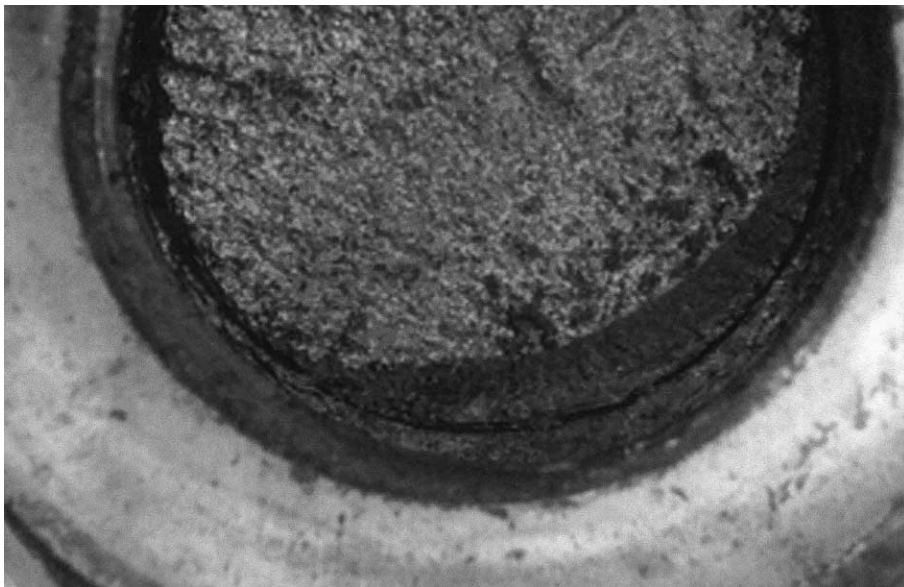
Detail of fracture initiation from a crescent shaped 3.3 mm deep fatigue crack.
